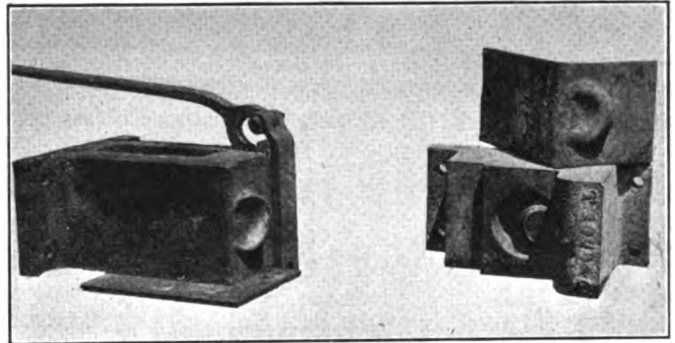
Bulldozer dies for manufacturing push pole corner irons
